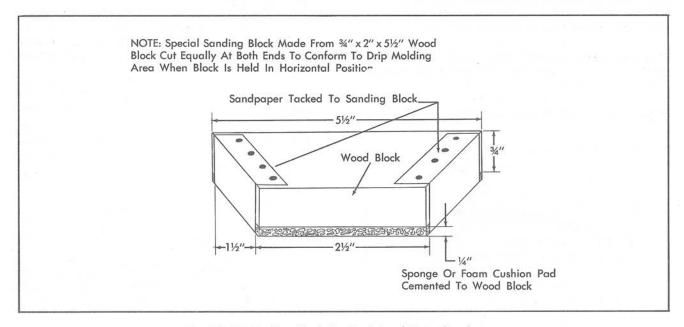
Sanding Block for Roof Panel Extension Area
